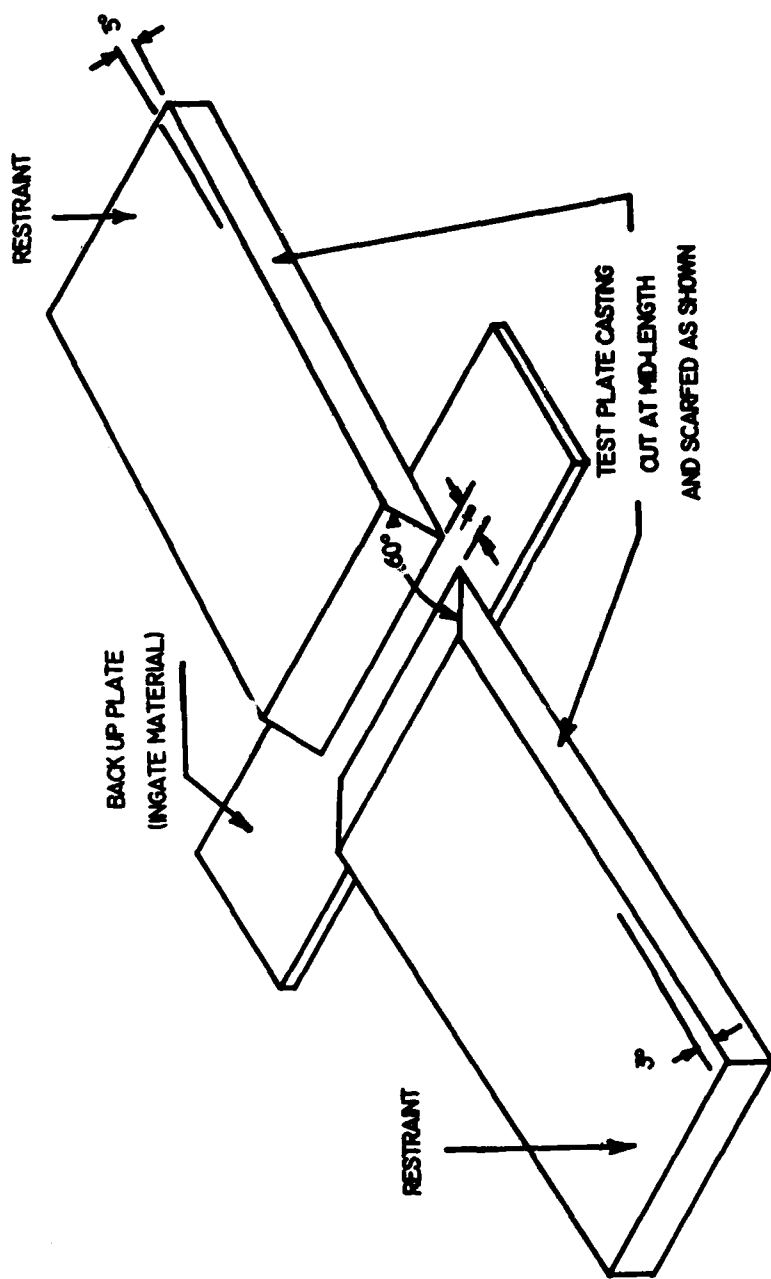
TEST PLATE WELD ASSEMBLY
